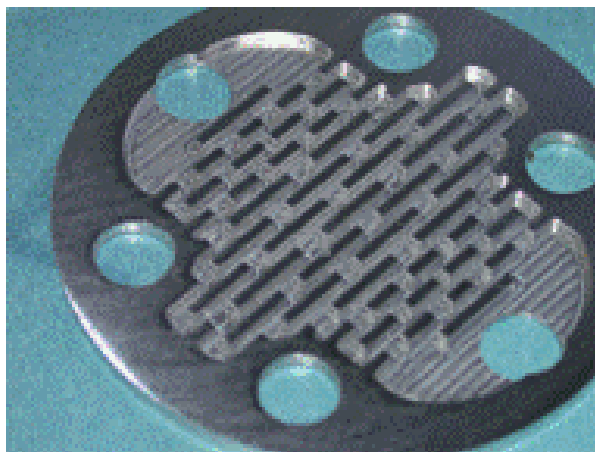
Picture of one out of 36 Bread Board Heat eXchanger plates
